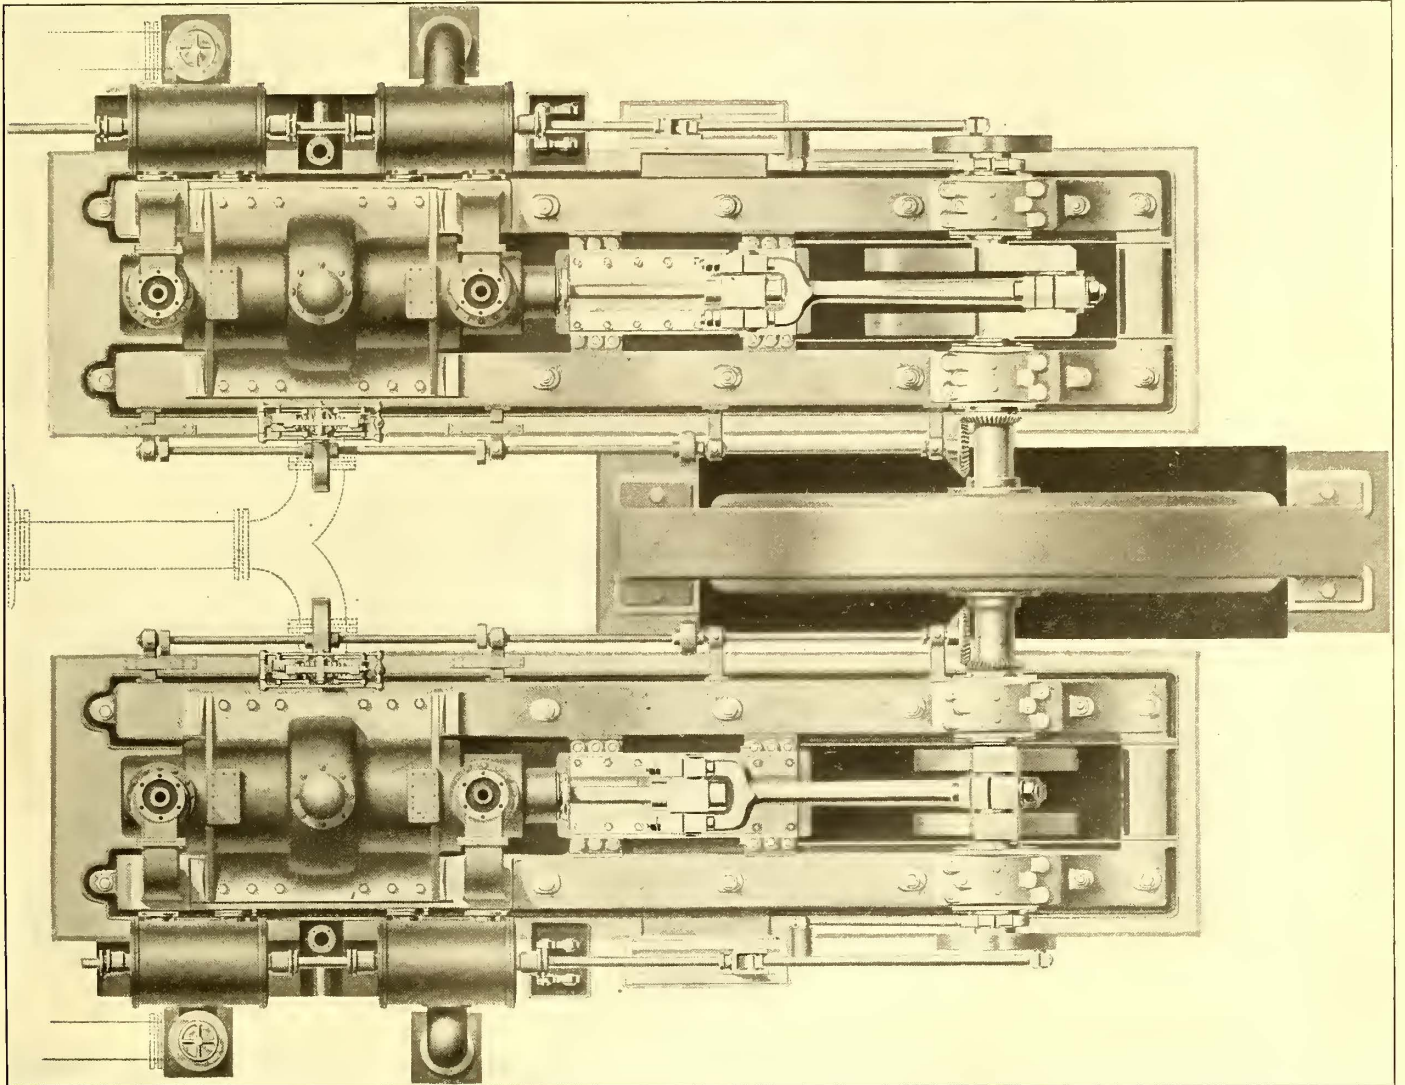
LARGE DIRECT-CONNECTED GAS ENGINE AND ALTERNATOR
